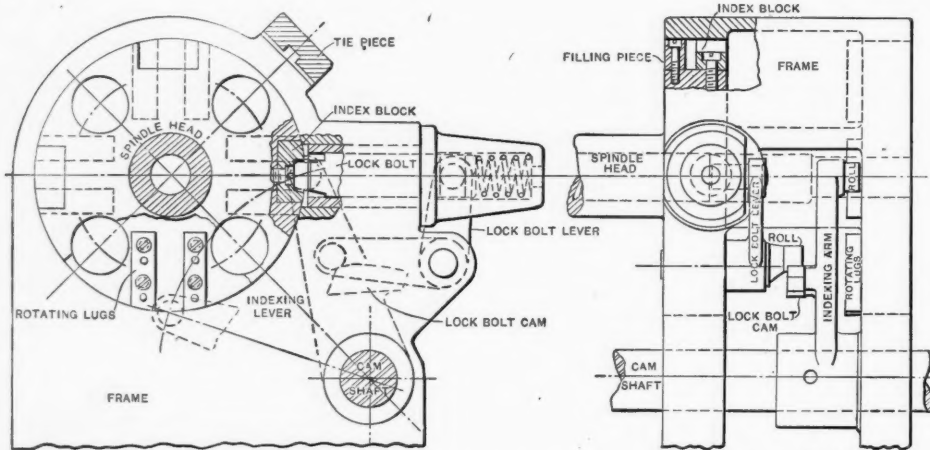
Sketch showing the Spindle Head and the Indexing and Locking Mechanism.
